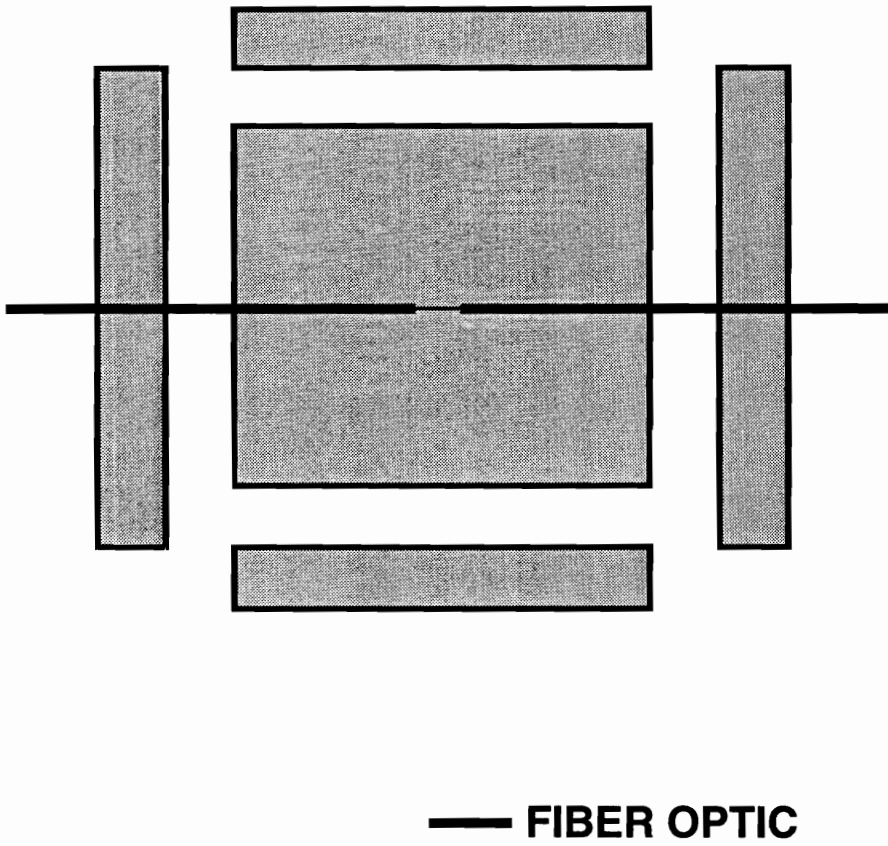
Resin Casting Mold Adapted for Fiber Optics.
